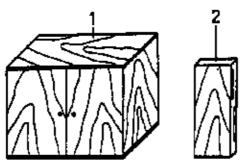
Staining test on a material of the same kind 1 piece of furniture, 2 staining test
